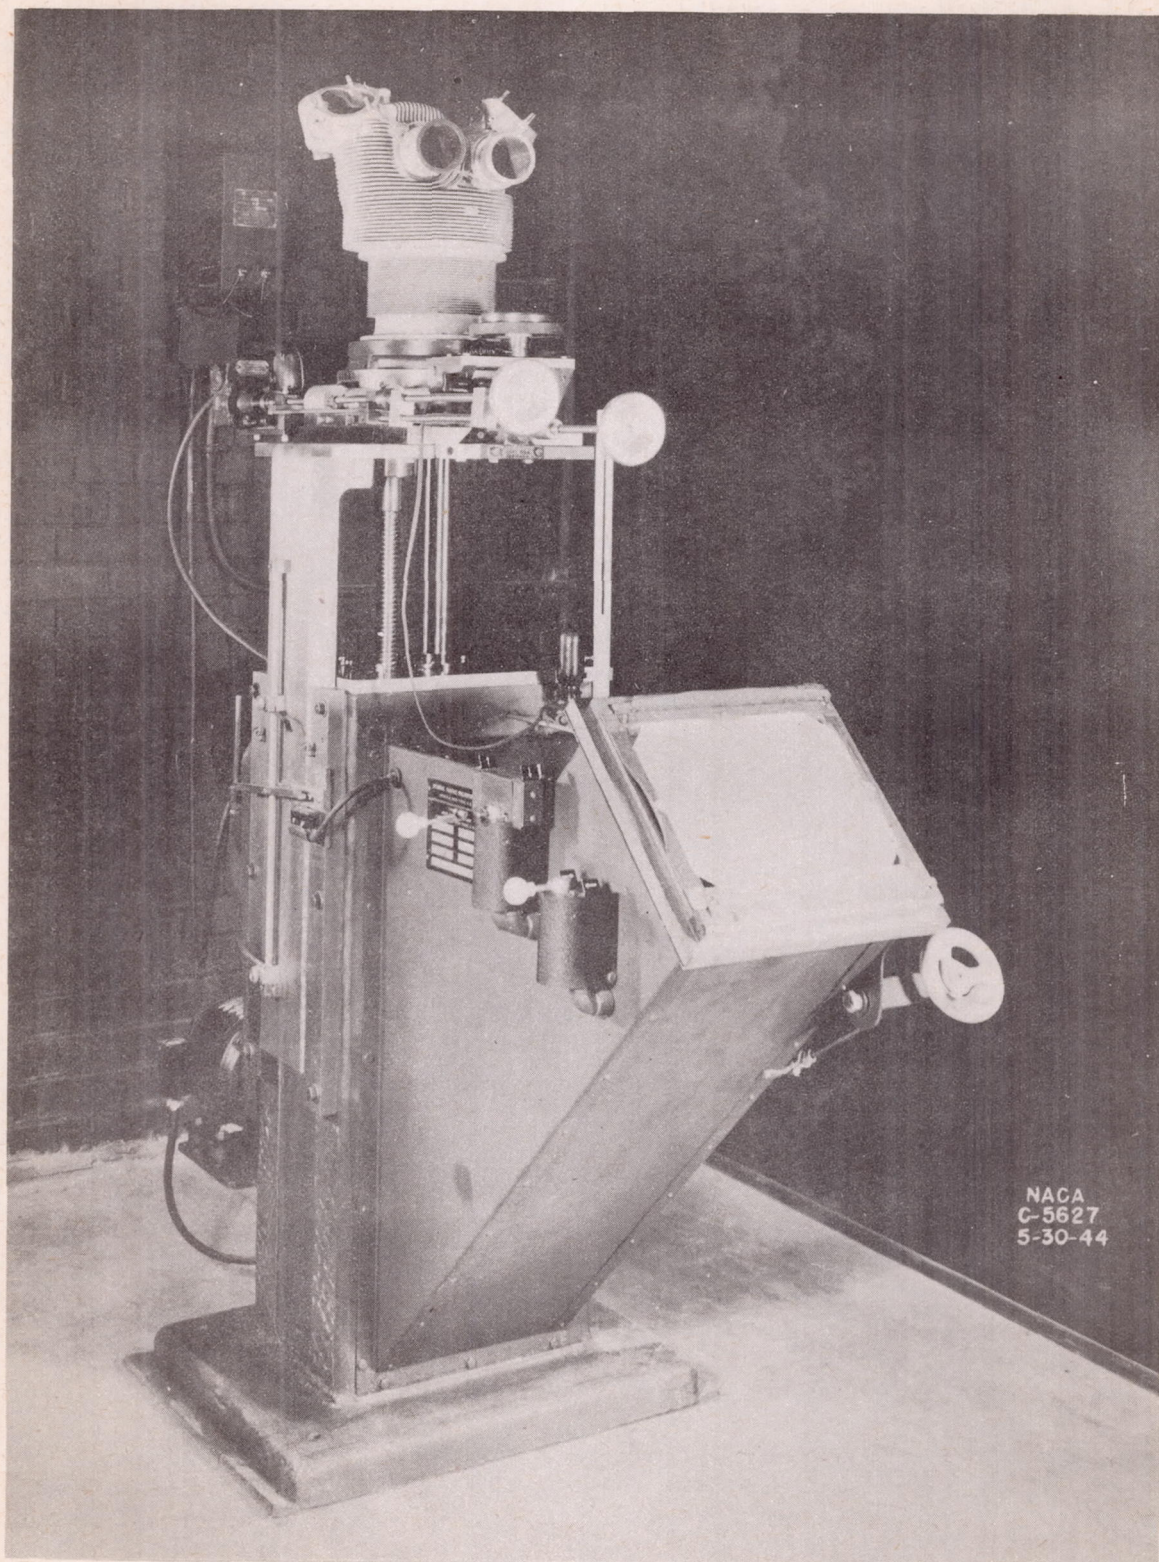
Internal-surface projector with cylinder barrel mounted for observation.
